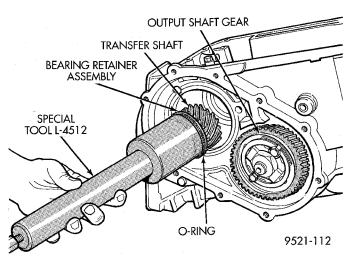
Remove or Install Transfer Shaft and Bearing Retainer Assembly Using Tool L-4512
